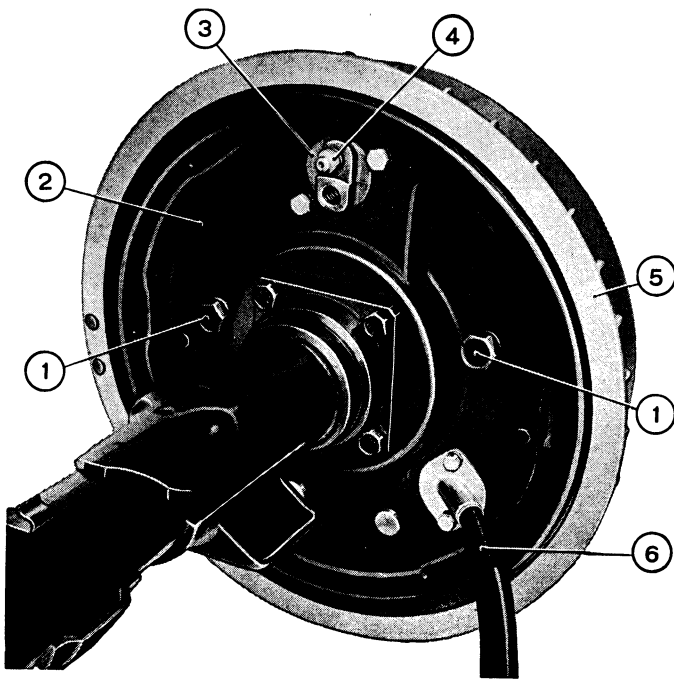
Close-up view of left-hand rear wheel brake backing plate (1500 Cabriolet).
